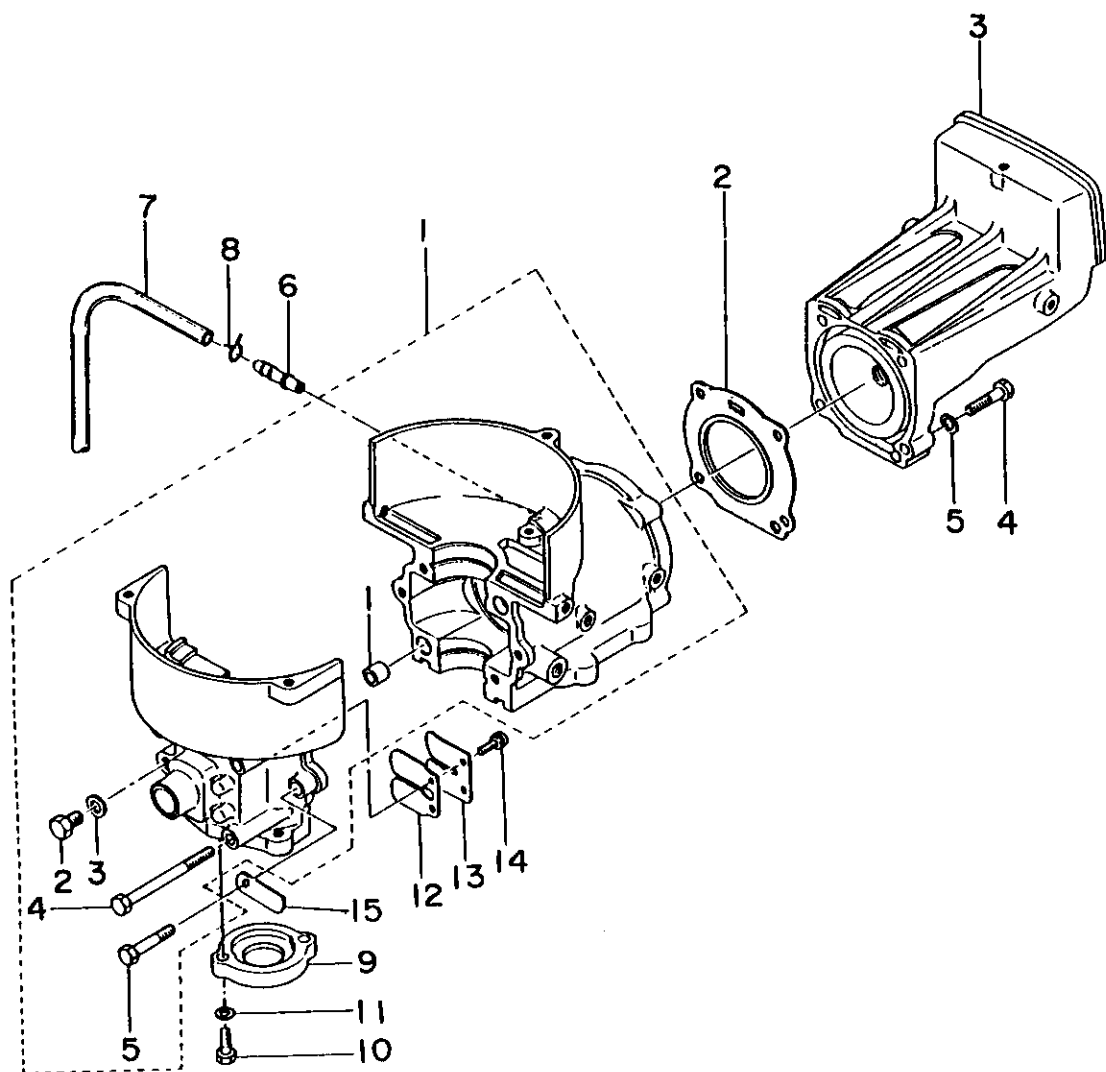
CYLINDER & CRANKCASE, REED VALVE
